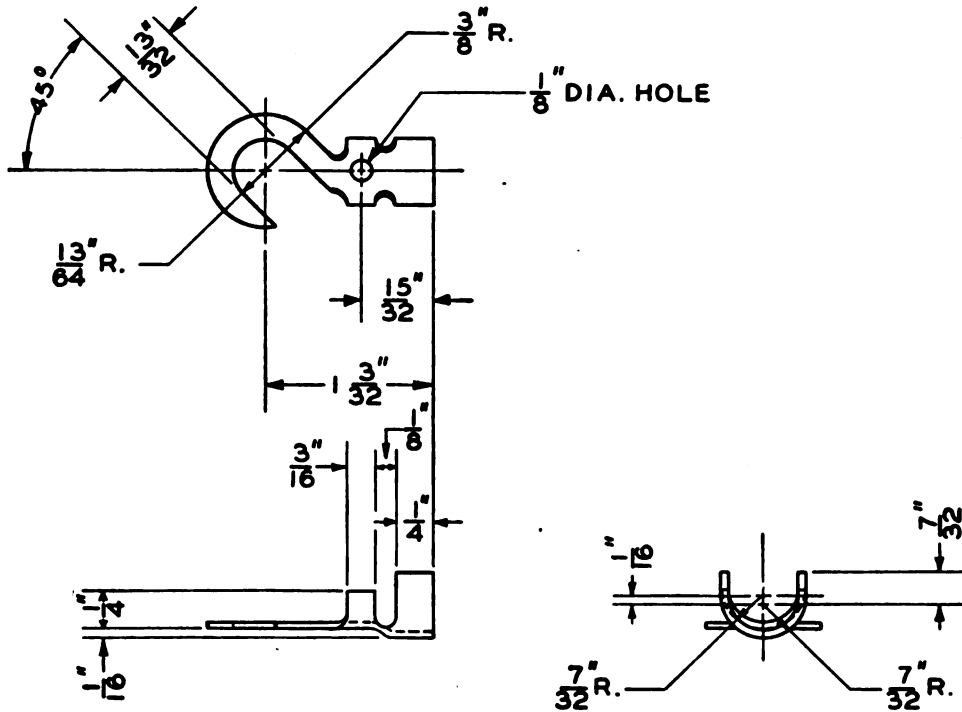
Mounting spacers for mounting radio equipment in Light Tanks M5 and M5A1.
